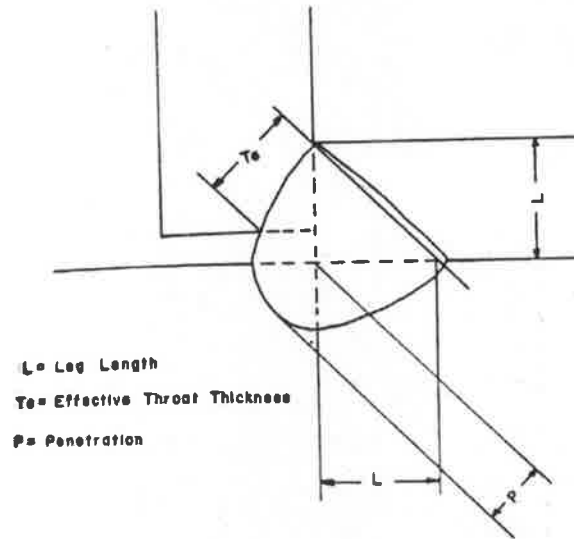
Dimensions of the various weld dimensions; Graville & Read [36].
